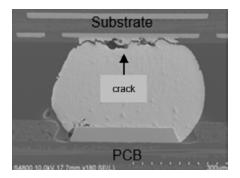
Illustration of bulk solder cracking, with a crack observed on the package side.
